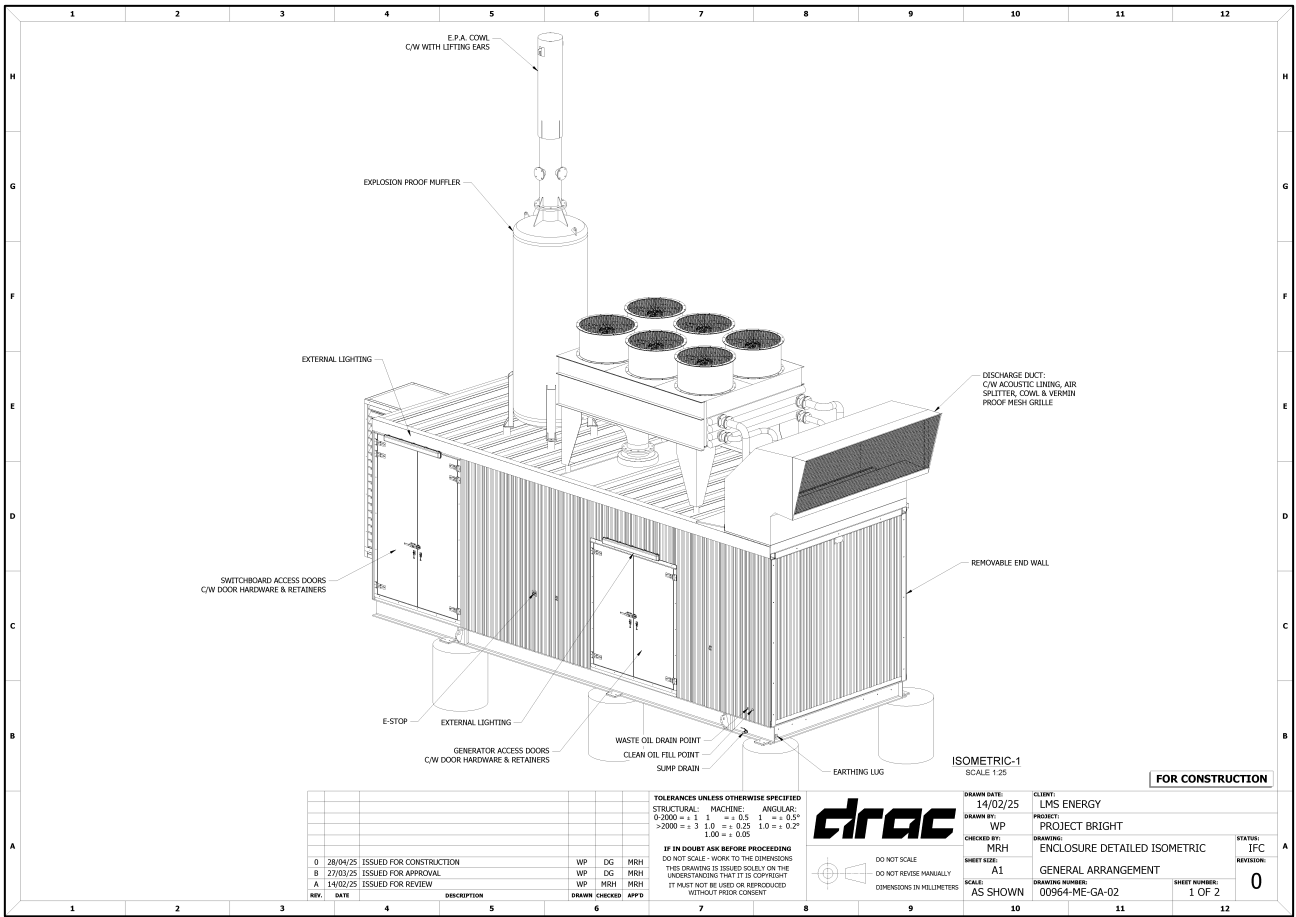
G3516 LE Generator enclosure: Isometric view 1
